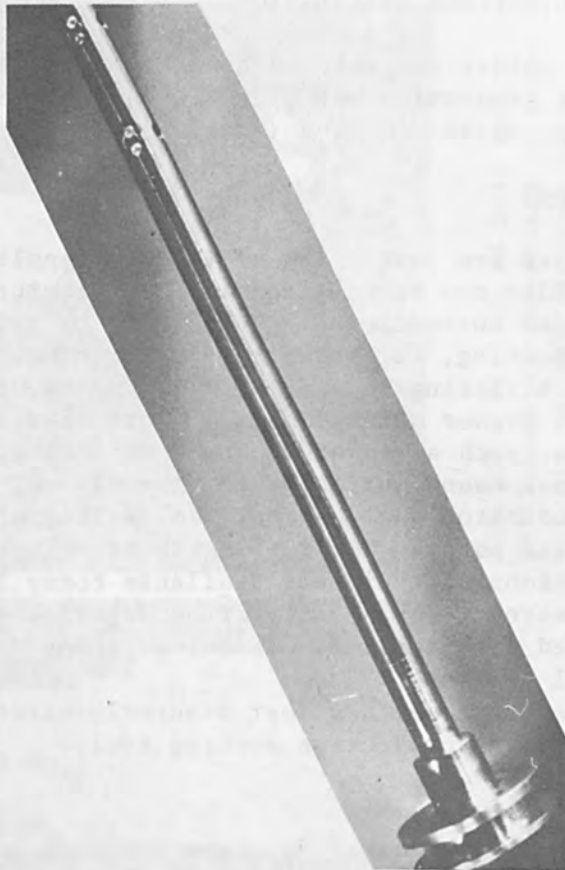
Pulley and shaft assembly in which out-of-tolerance holes are plugged by EB welder.
